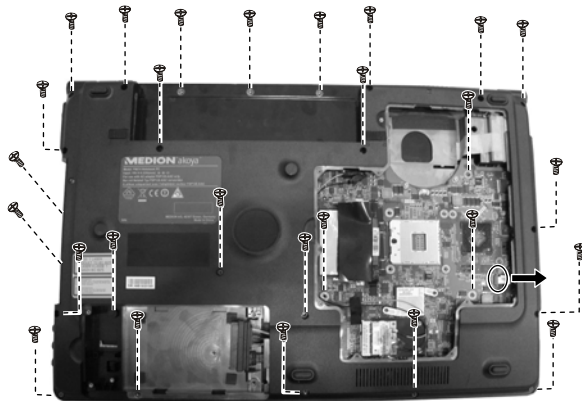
Remove twenty-seven screws and disconnect one cable
